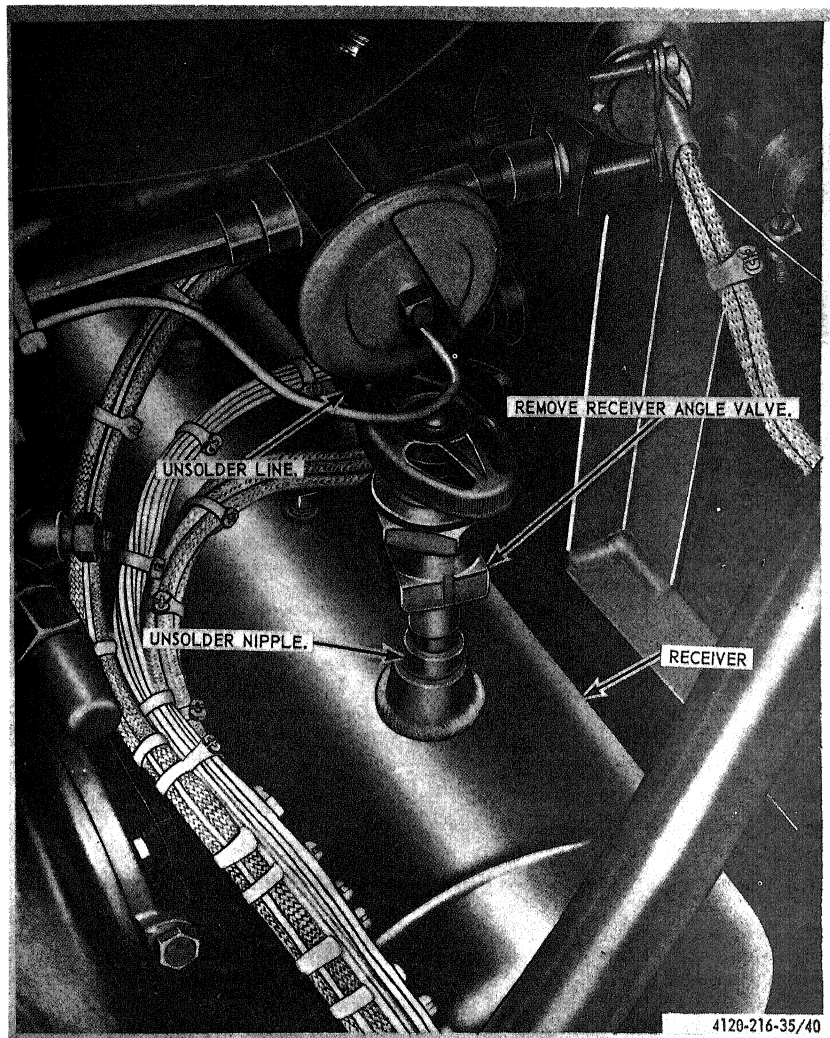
Receiver angle shutoff valve and tubes, removal and installation.
